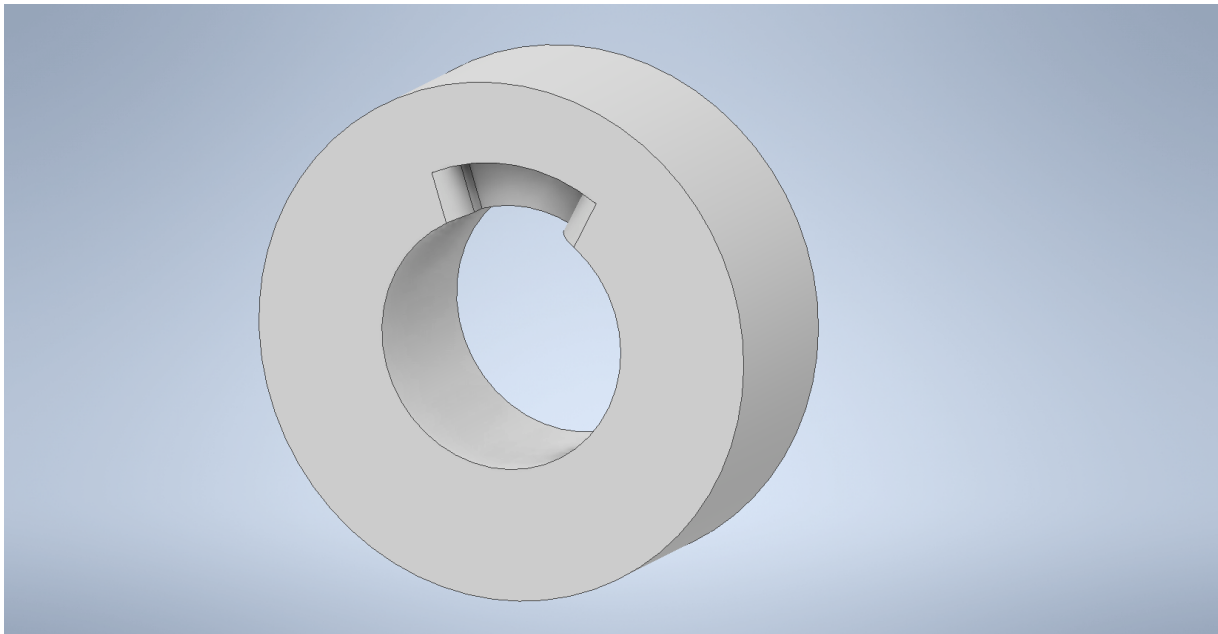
Isometric view of the cap showing the cutout for the actuator
